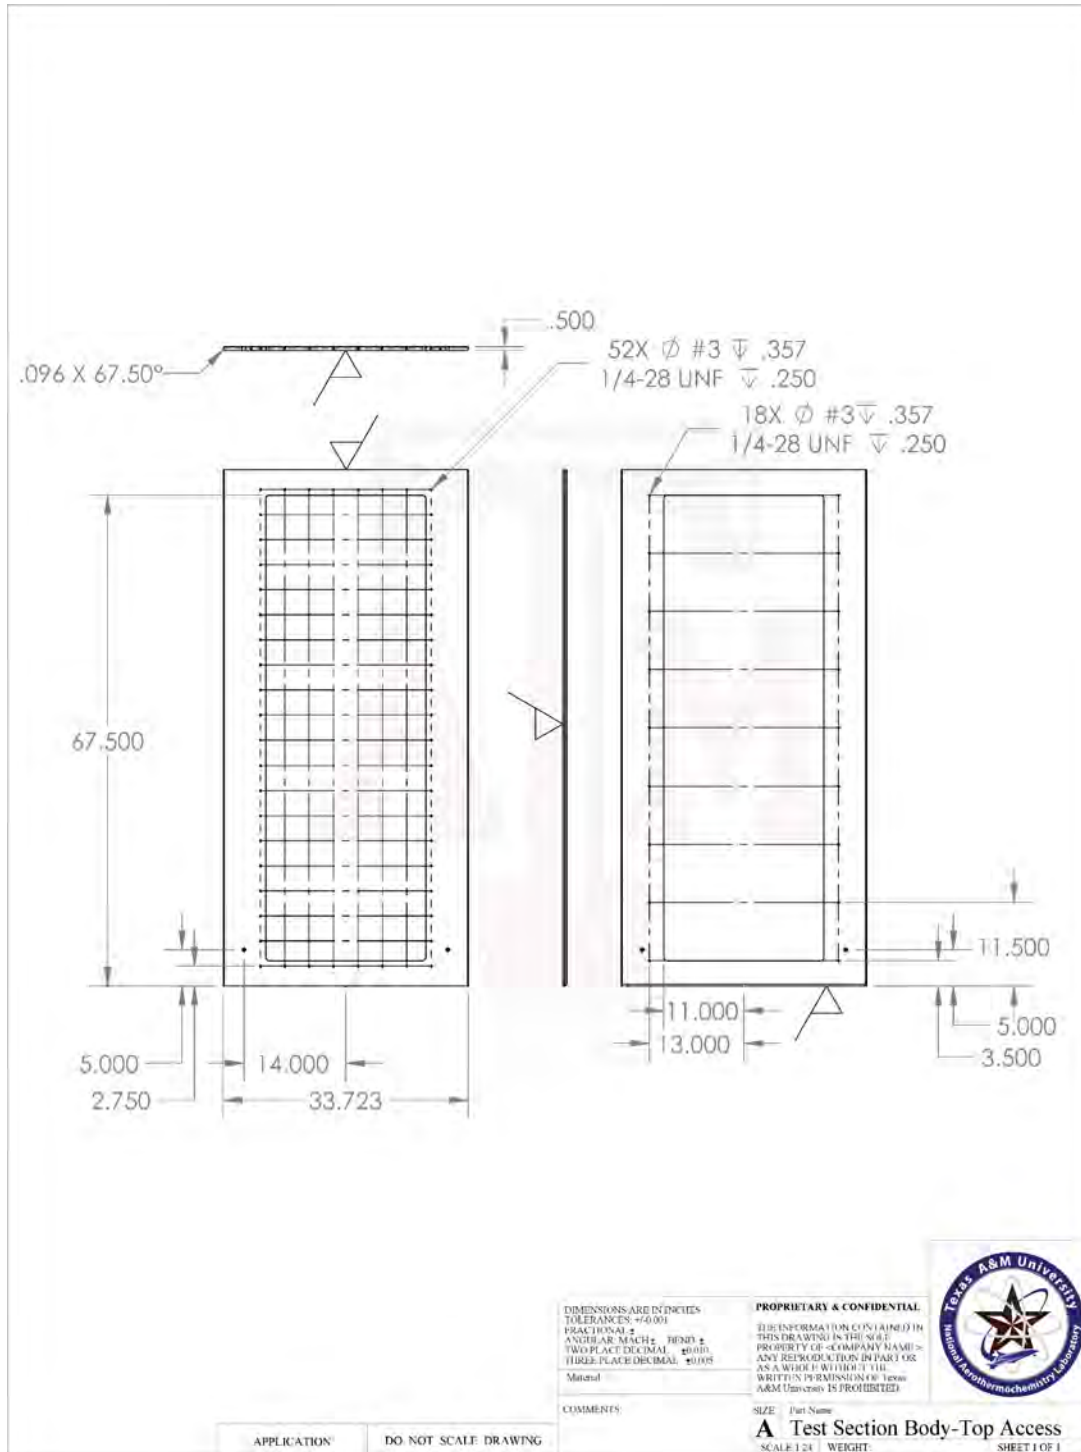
DIMENSIONAL DRAWING FOR THE ROOF PLATE OF THE TEST SECTION SKELETON.
